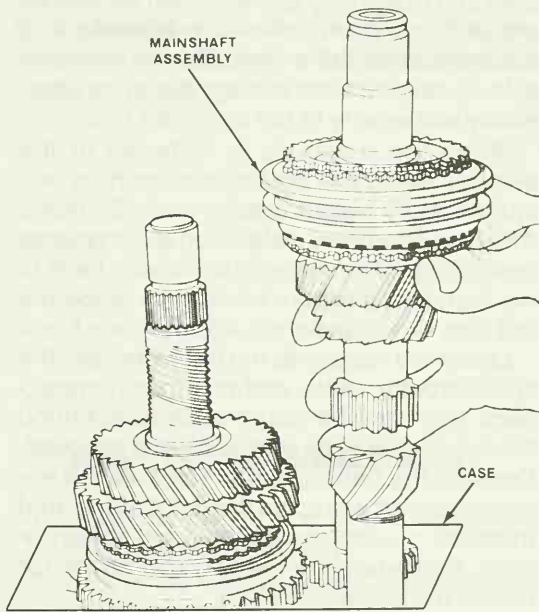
The partially assembled mainshaft is installed in the case. (Chrysler Corporation)
